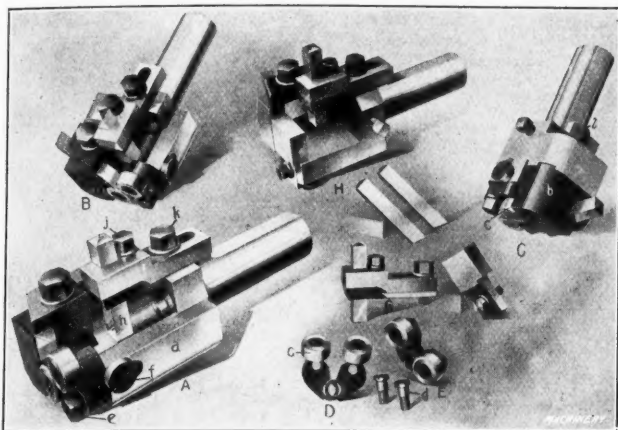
Group of Over-cut Box-tools used on the "Acme" Multiple-spindle Automatic Screw Machines
